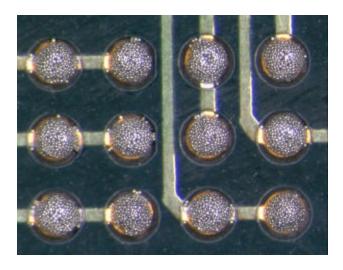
Solder Paste Deposits of 96.5Sn/3.5Ag Paste
